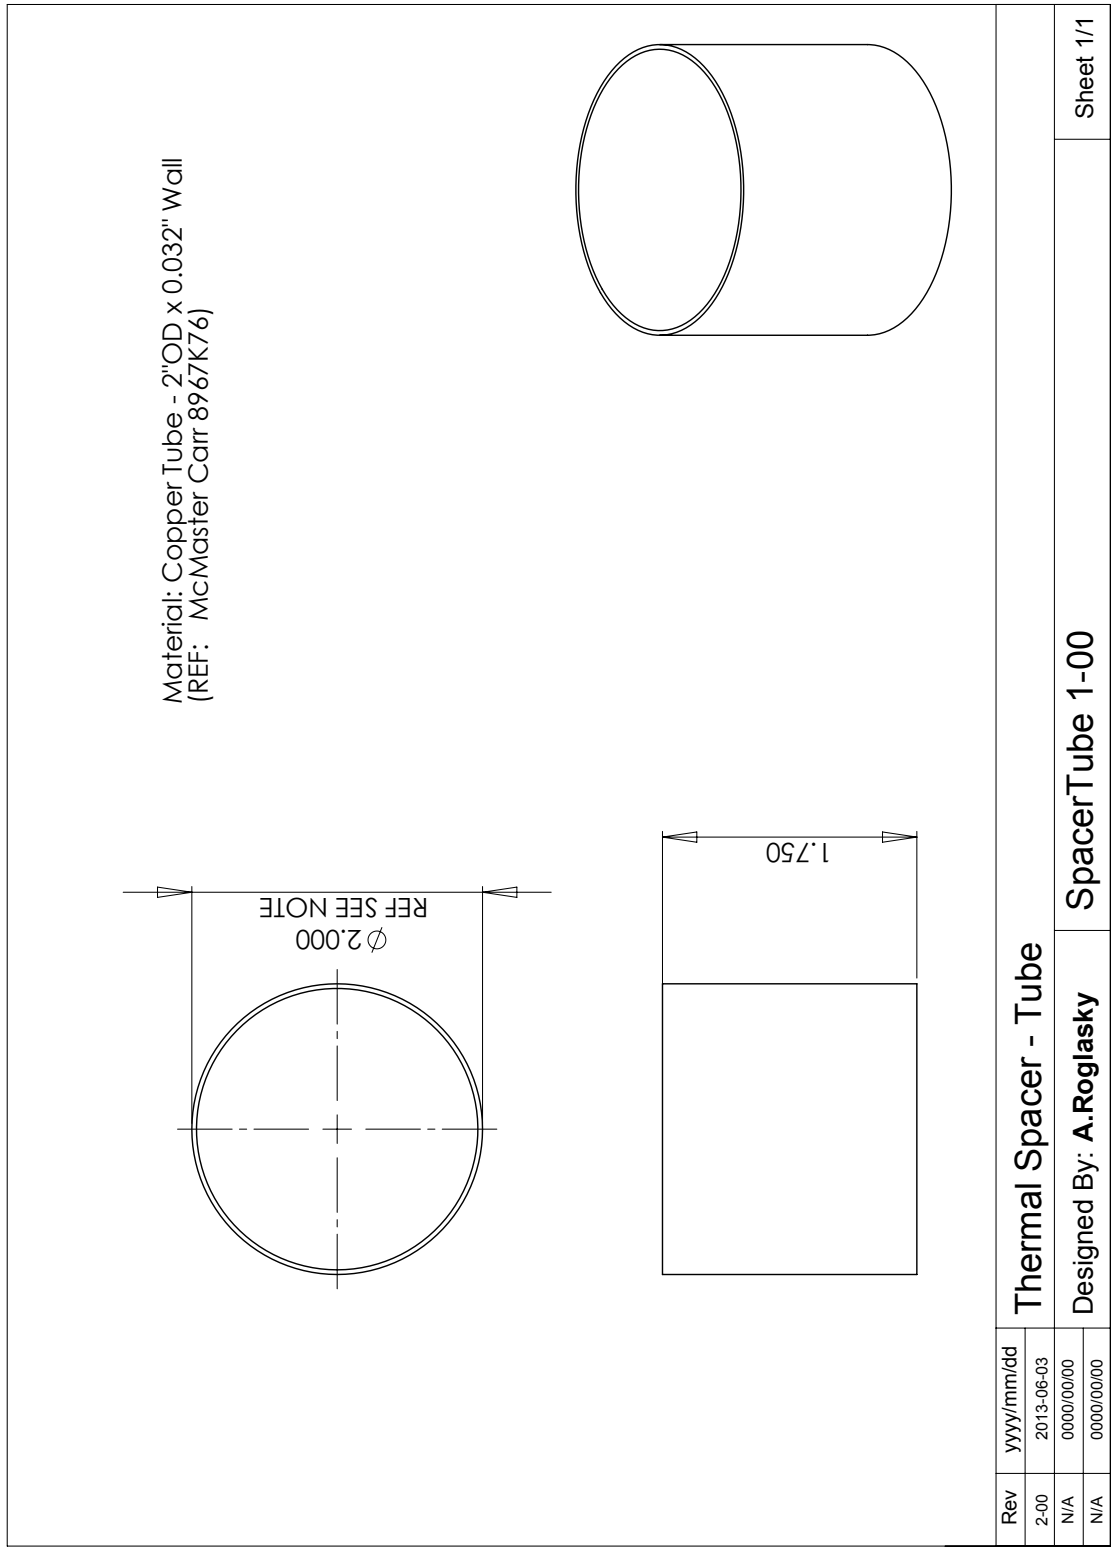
Thermal Isolation Spacer Assembly / Tube
